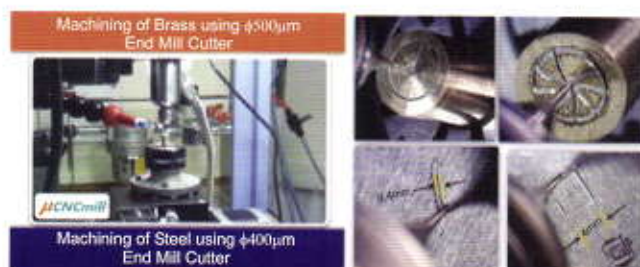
Five axis micro milling machine prototype (left) and sample cutting by five axis micro milling machine (right)
